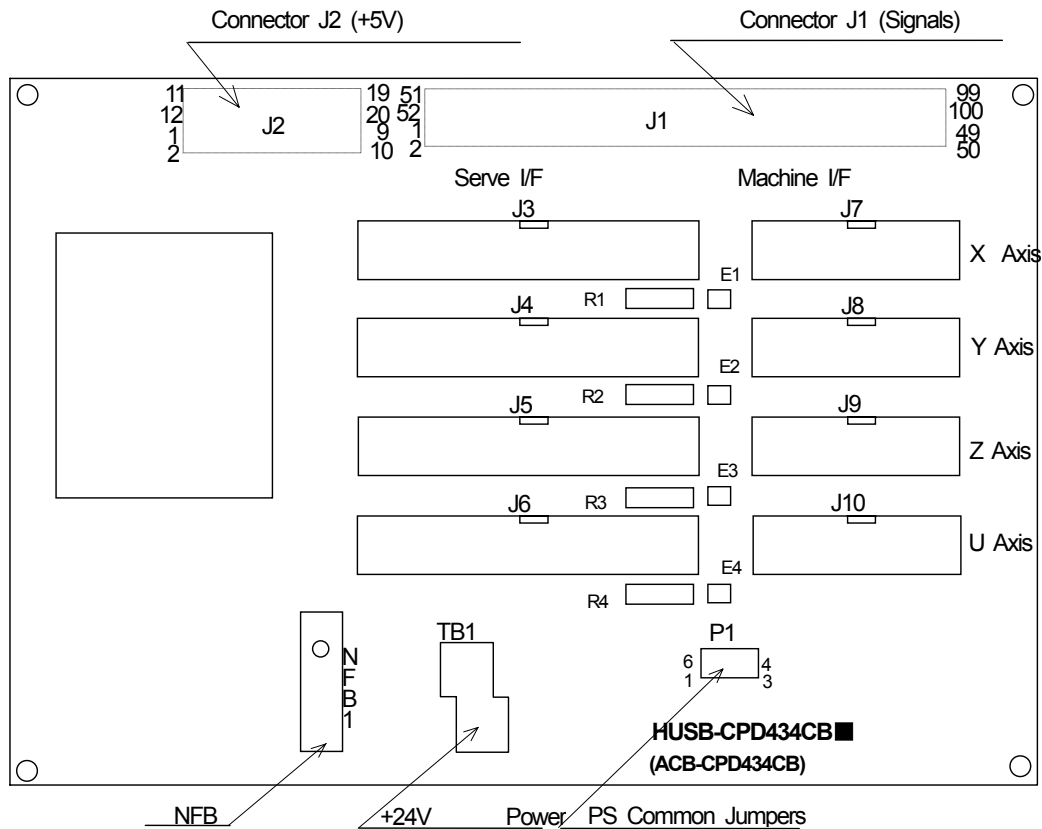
4-5 Connector Board ACB-CPD434CB Component Layout
